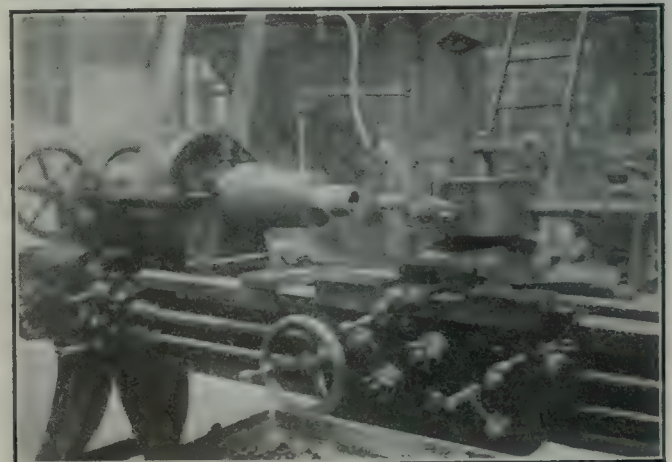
AMERICAN LATHE WITH TURRET FOR FINISHING INSIDE OF NOSE, 18-POUNDER SHELL.
